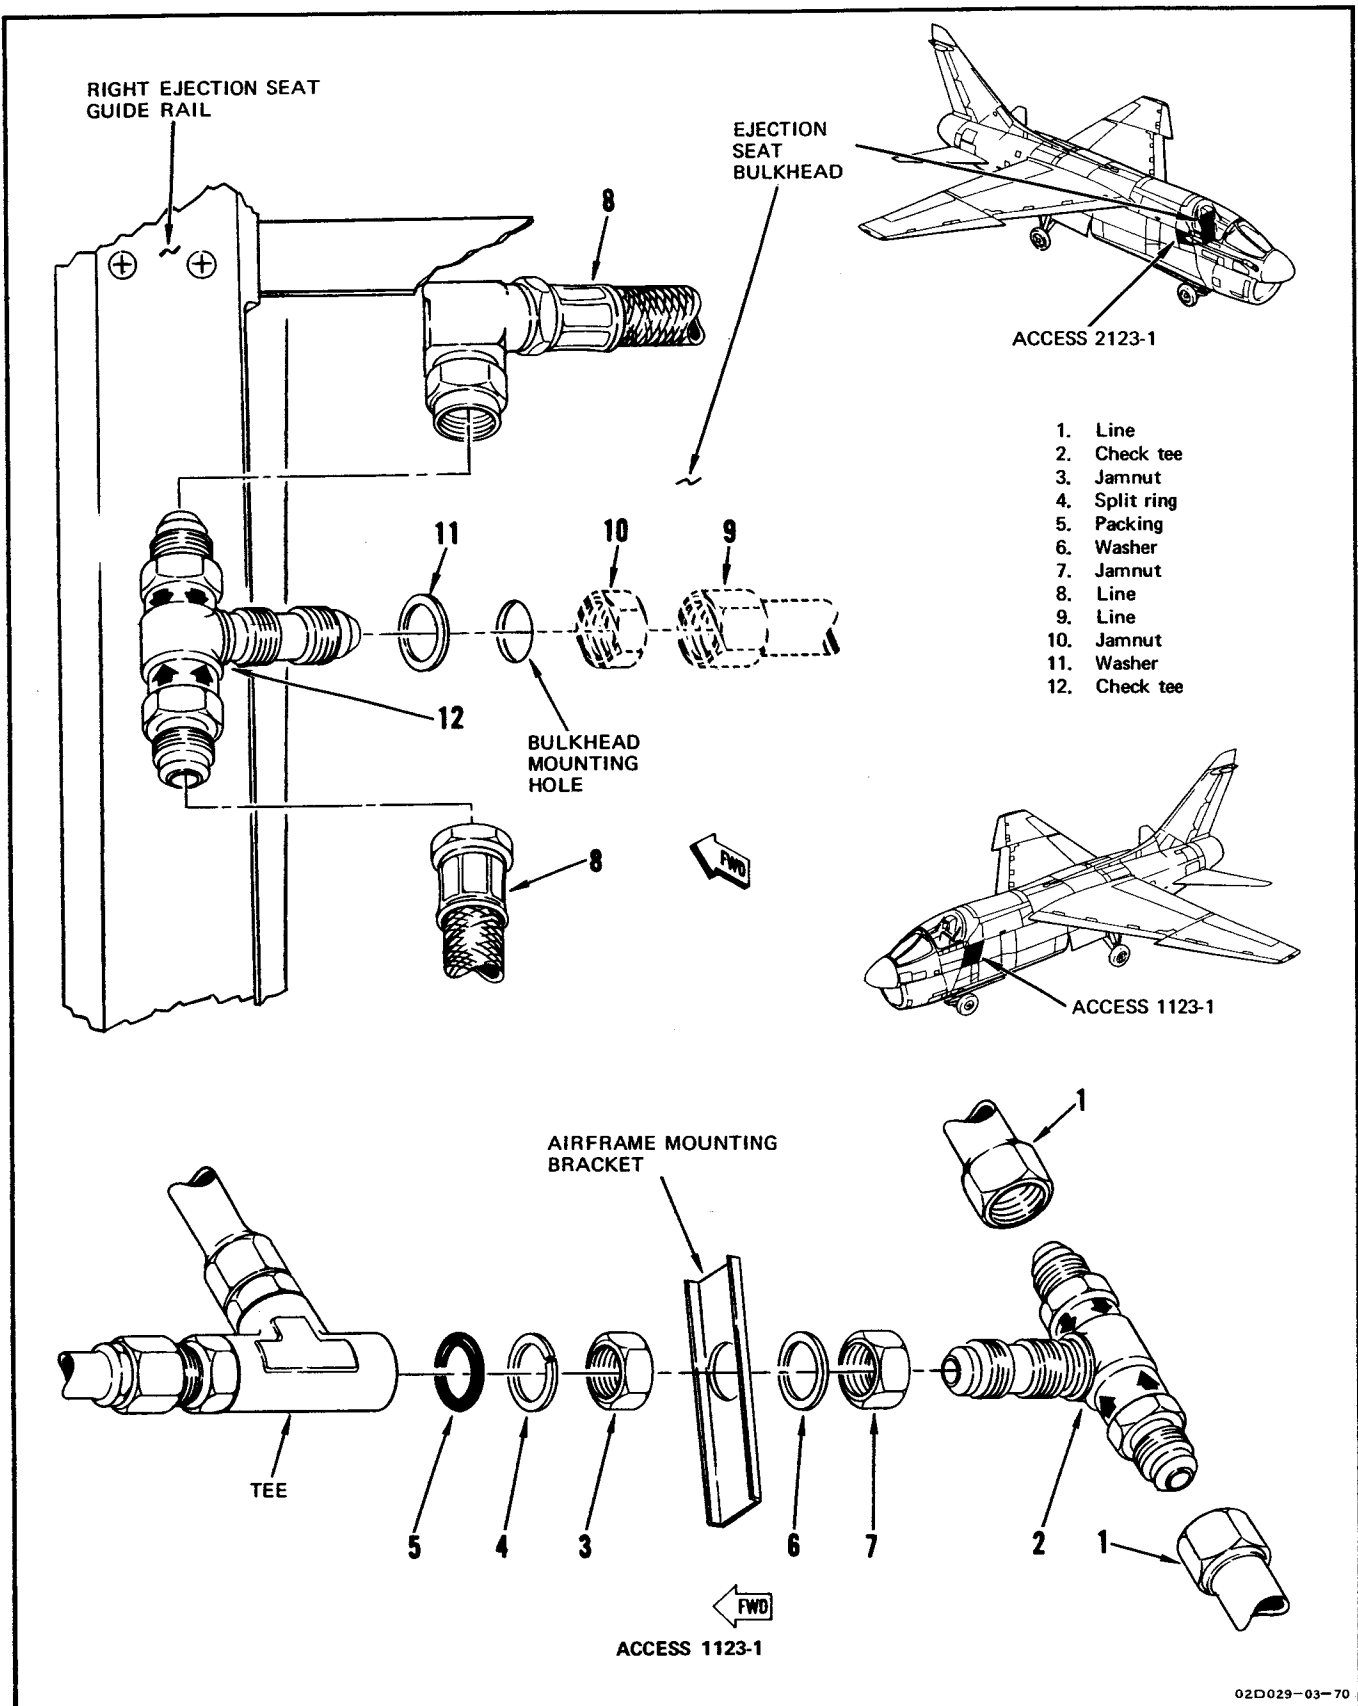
Check Tee Removal and Installation (Airplanes AF68-8225 and Subsequent)
